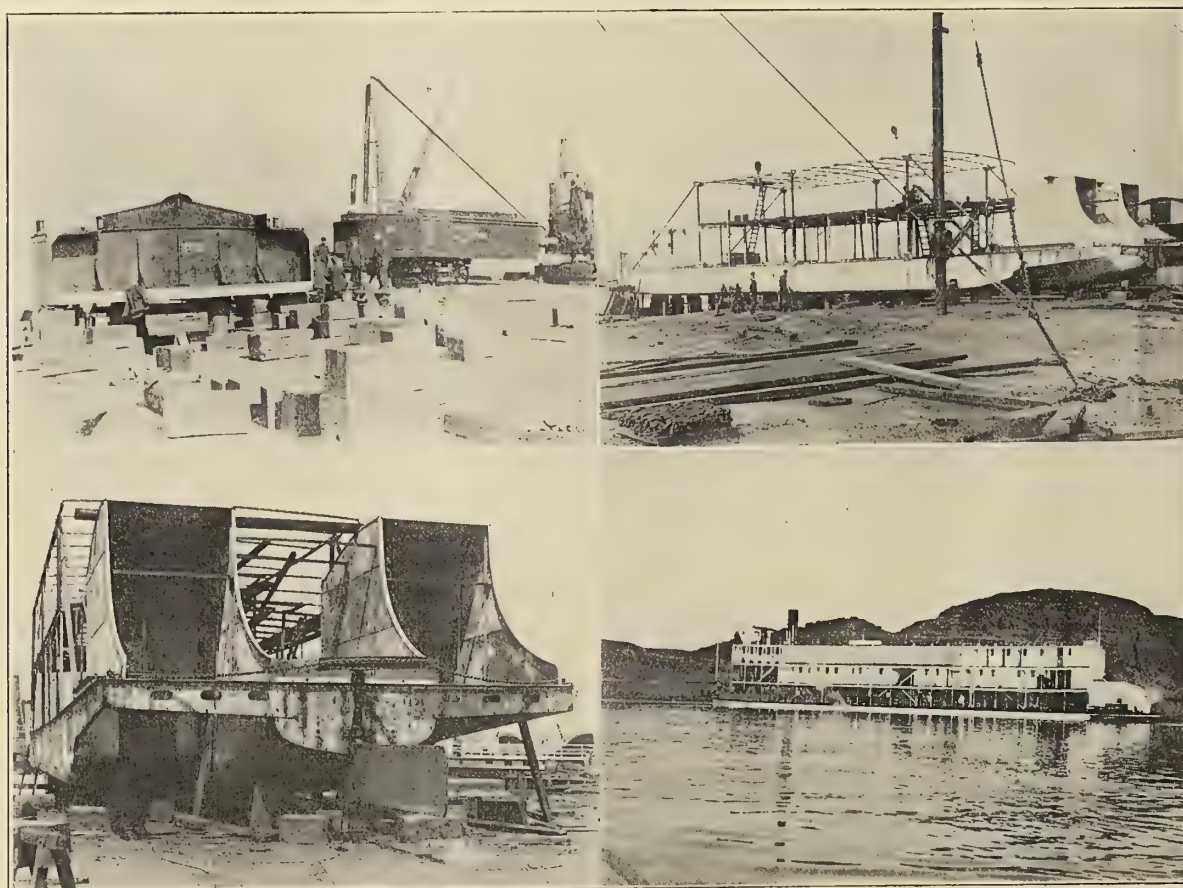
LARGE STEEL HULL, STERN-WHEEL RIVER STEAMER IN VARIOUS STAGES OF CONSTRUCTION.
